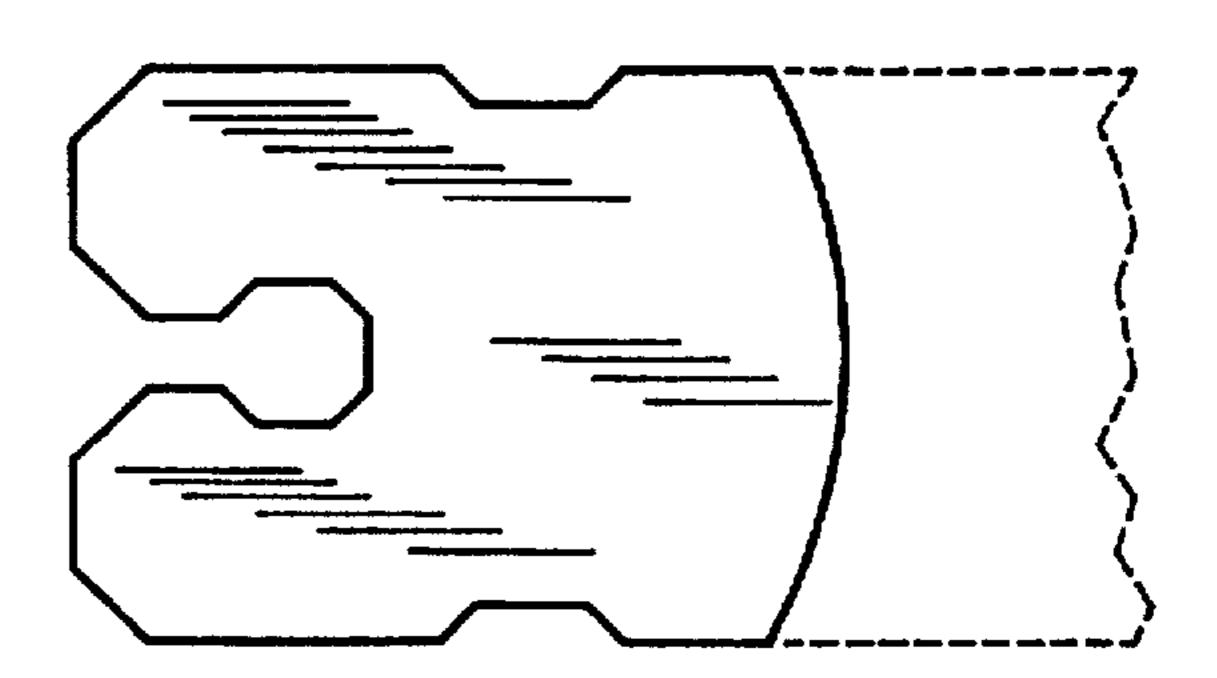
is a front elevation view of a saw blade hub showing our new design, the rear elevation view being identical;
